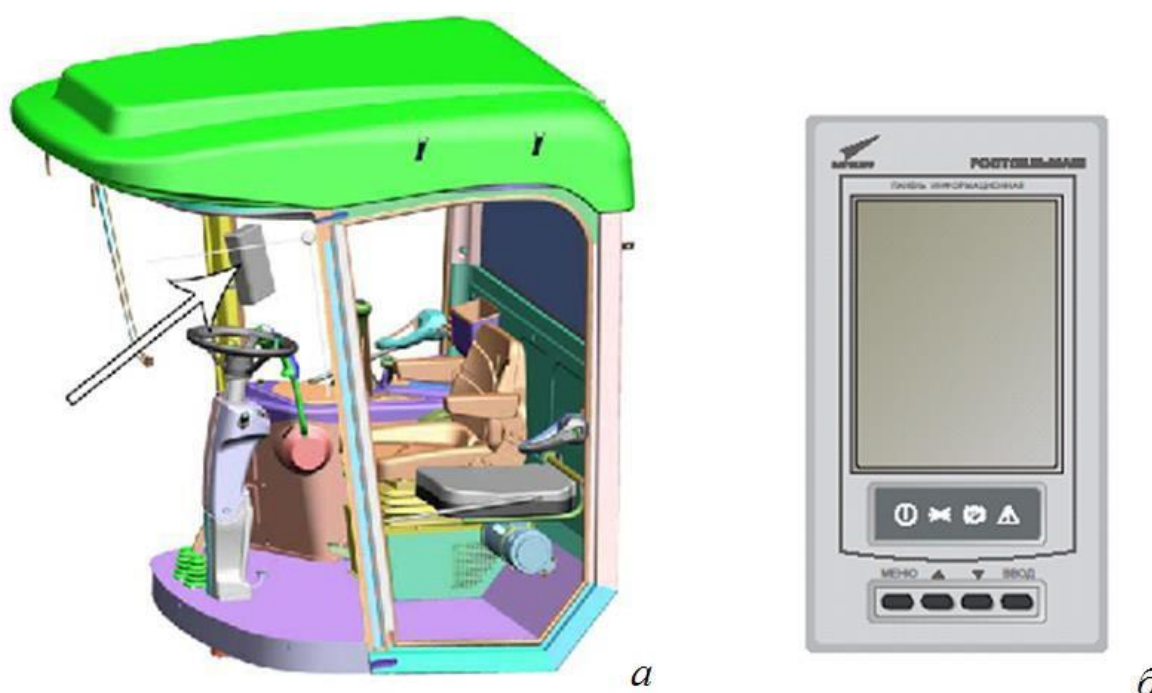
Information panel PI-142: a – location of the panel; b – appearance of the panel
